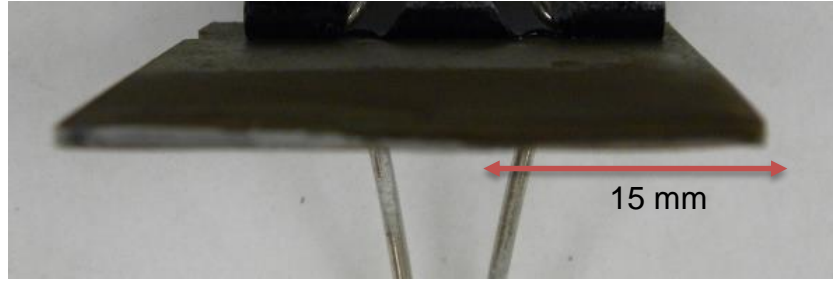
Photo of fracture surface of sample F7 (80%)
